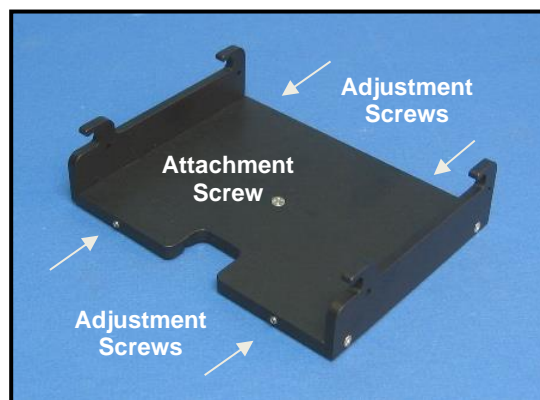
Mounting Plate with Rotational Adjustment, BMPPER, shown without Pin Tool attached.
